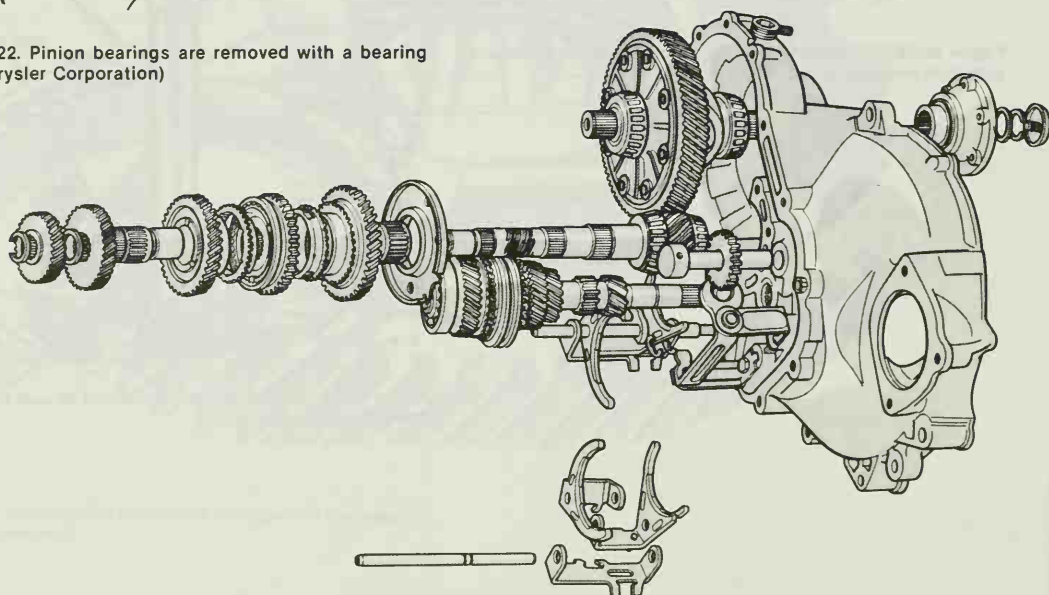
An exploded view of the transaxle helps in reassembly. (Chrysler Corporation)
